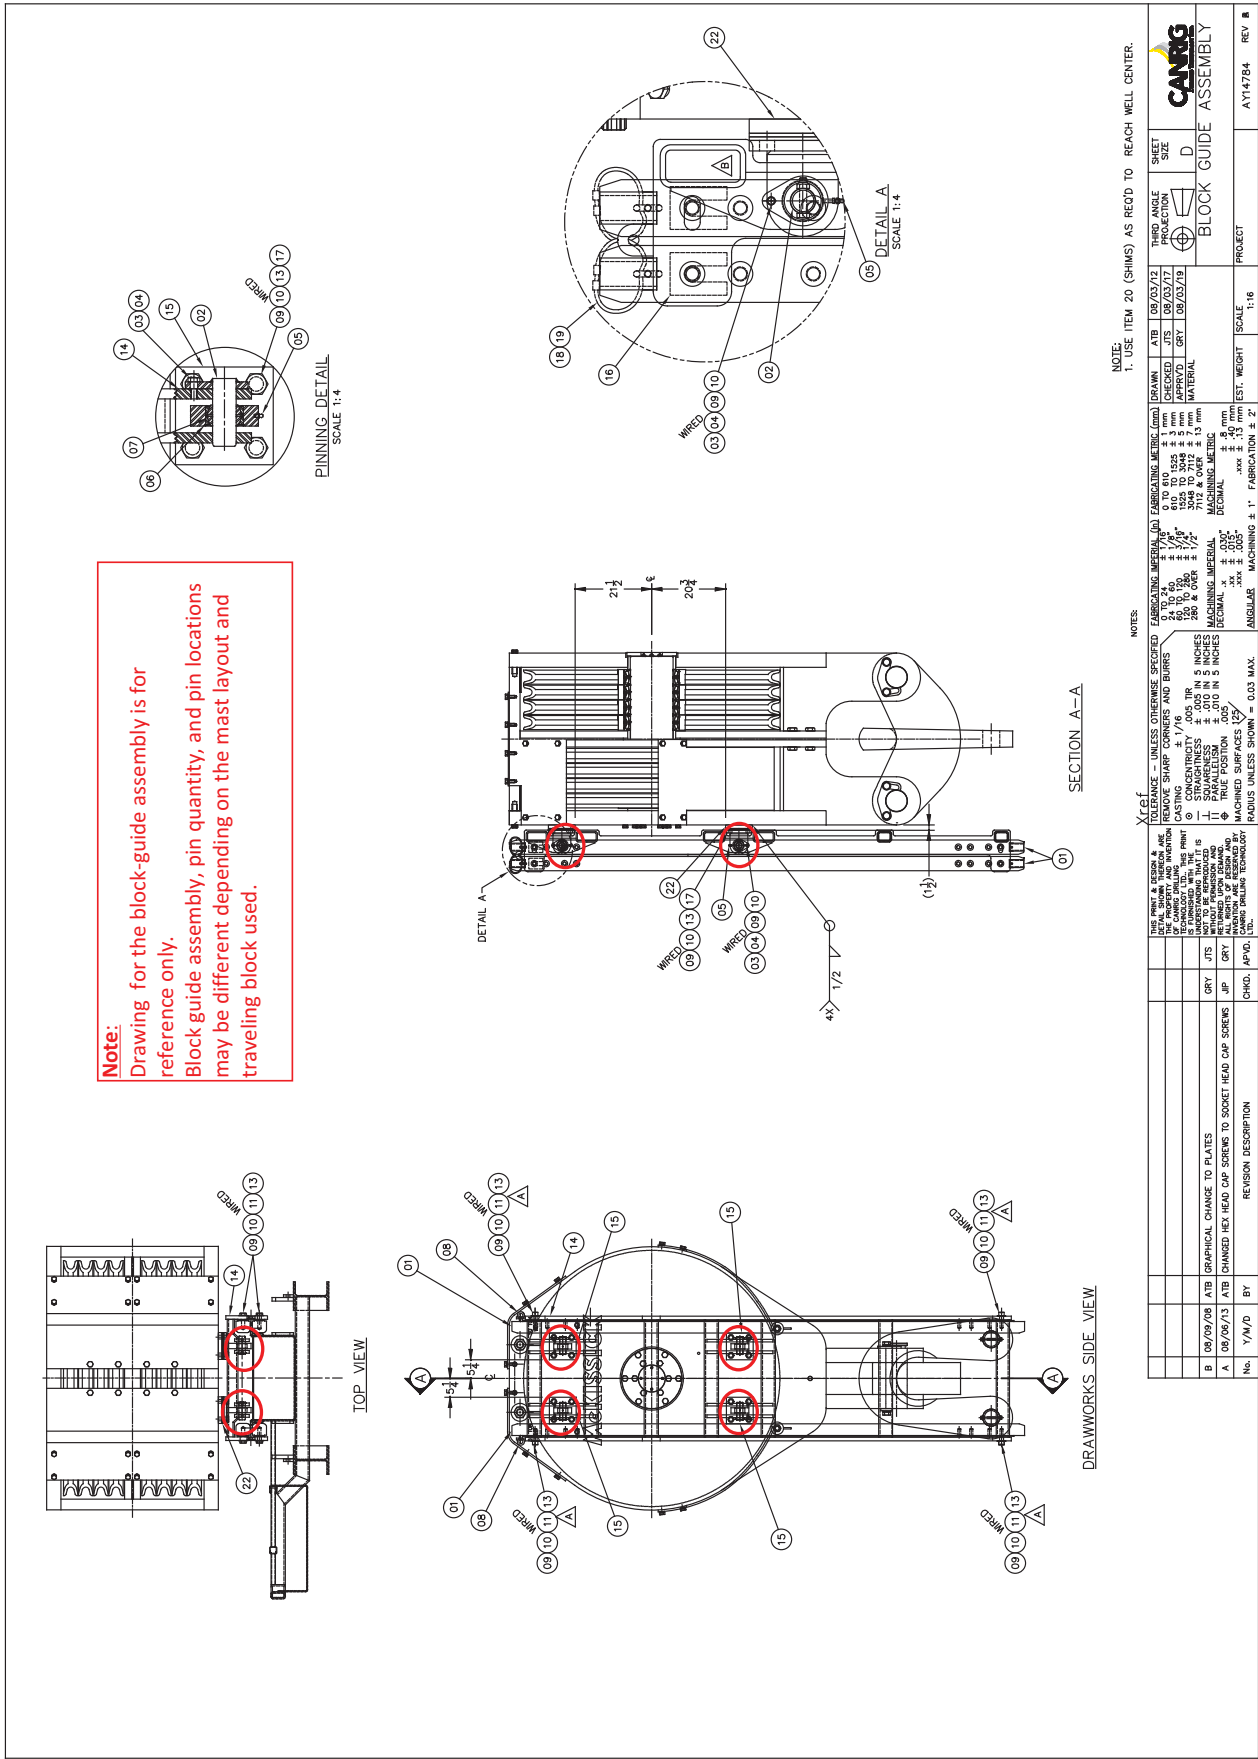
Block Guide Assembly Drawing AY14784 - For Reference Only
